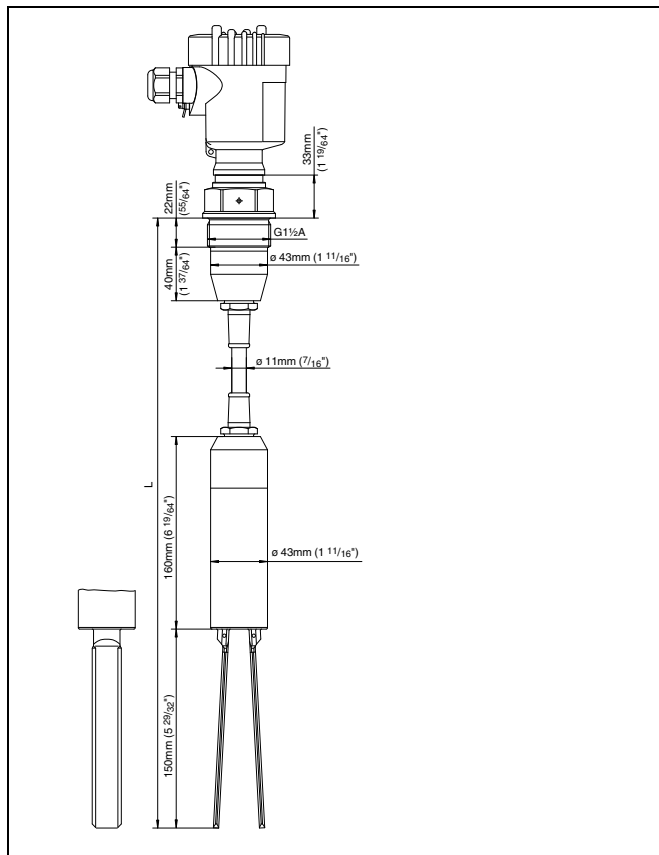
VEGA/IB 62 - threaded version G1 1/2
